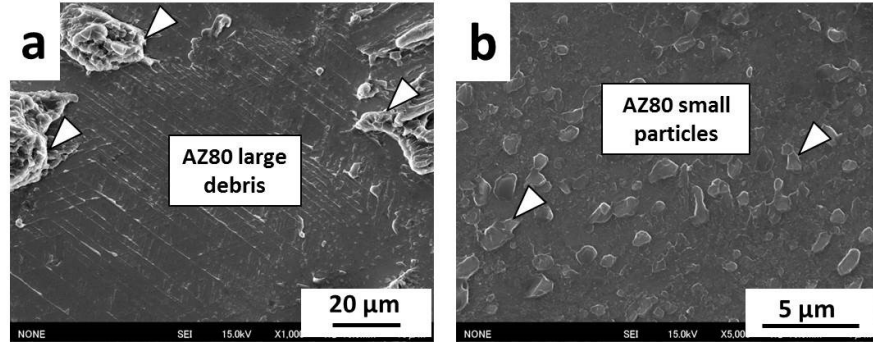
Fracture surfaces of Ti/AZ80 bonded at 400 °C for 1 h observed on Ti side a) Large AZ80 debris and b) AZ80 particles on smooth fracture area.
